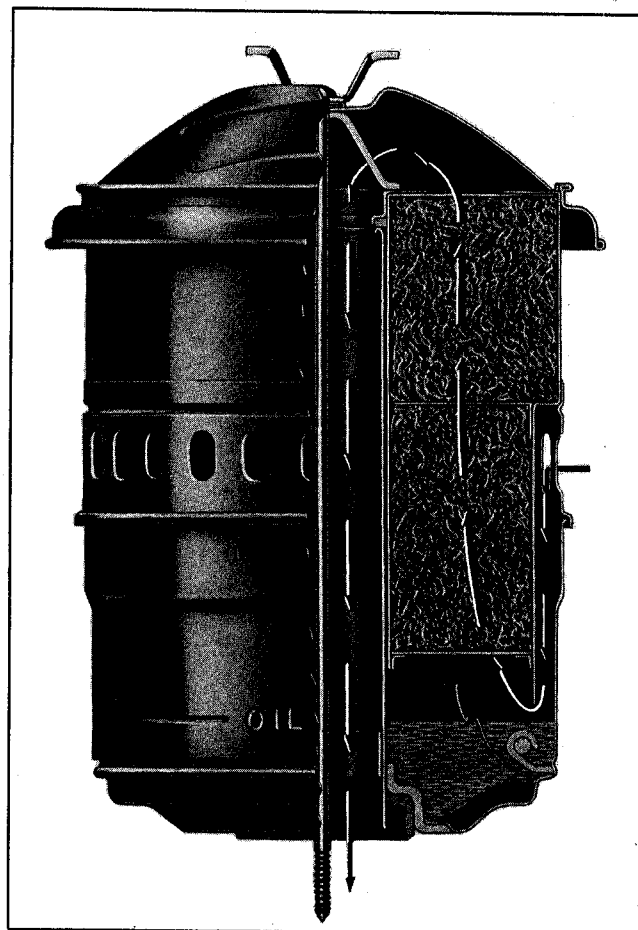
Oil Bath Air Cleaner and Silencer Assembly.
